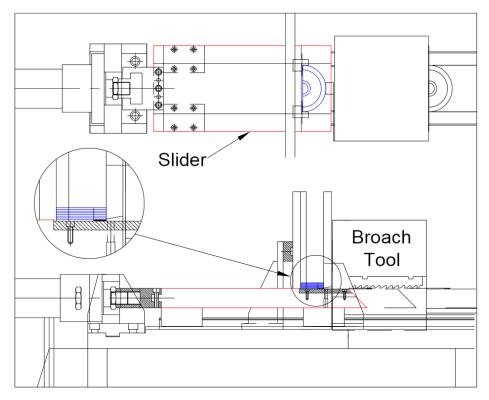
Illustrating Reciprocating Slider Mechanism
